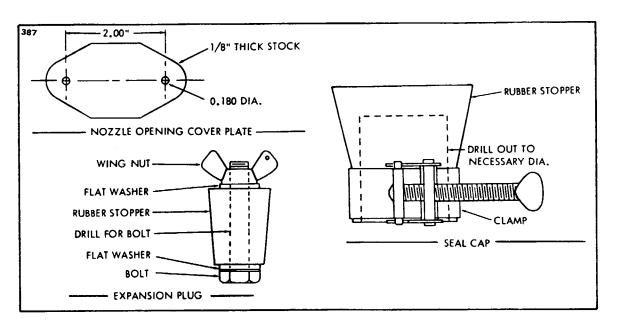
Suggested Design for Seal Plate, Plugs and Caps for Combustion Tube Leakage Test
